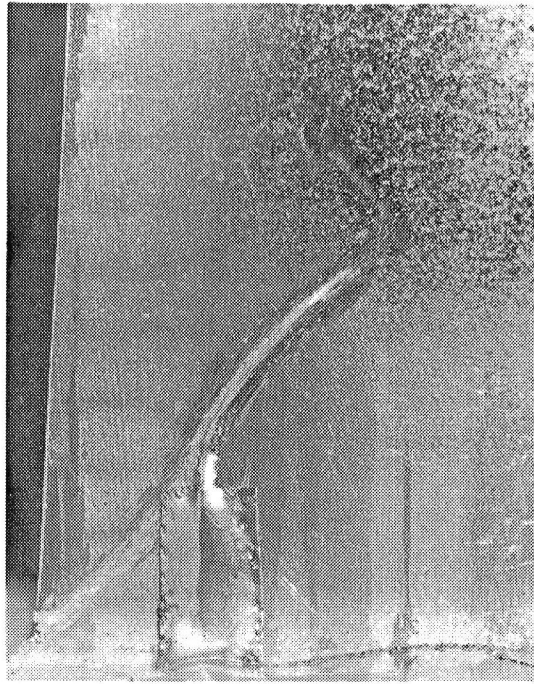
Embedded Thermocouple Sensor - Alumel Wire Installed in Blade Hot Side Surface. (The wire is covered by a thin foil after emerging from surface for protection during calibration.)
